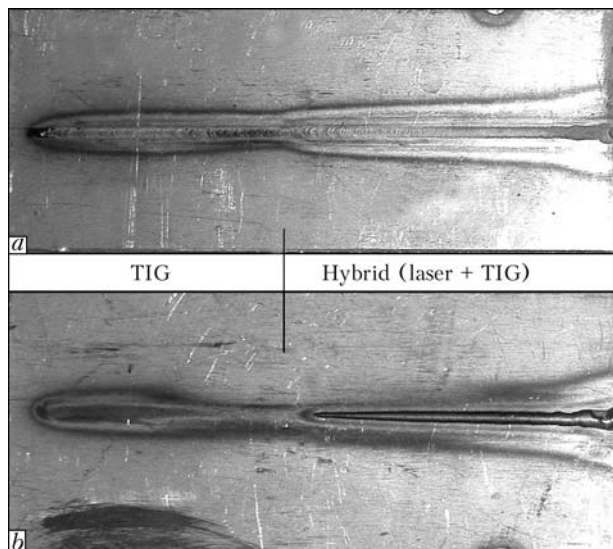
Top (a) and back (b) view of welded samples 1.5 mm thick ($P_L = 250$ W, $I_a = 25$ A, $v_w = 100$ mm/min, without flux)
